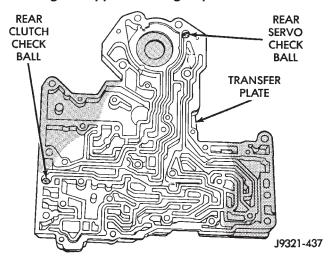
Rear Clutch And Rear Servo Check Ball Locations
